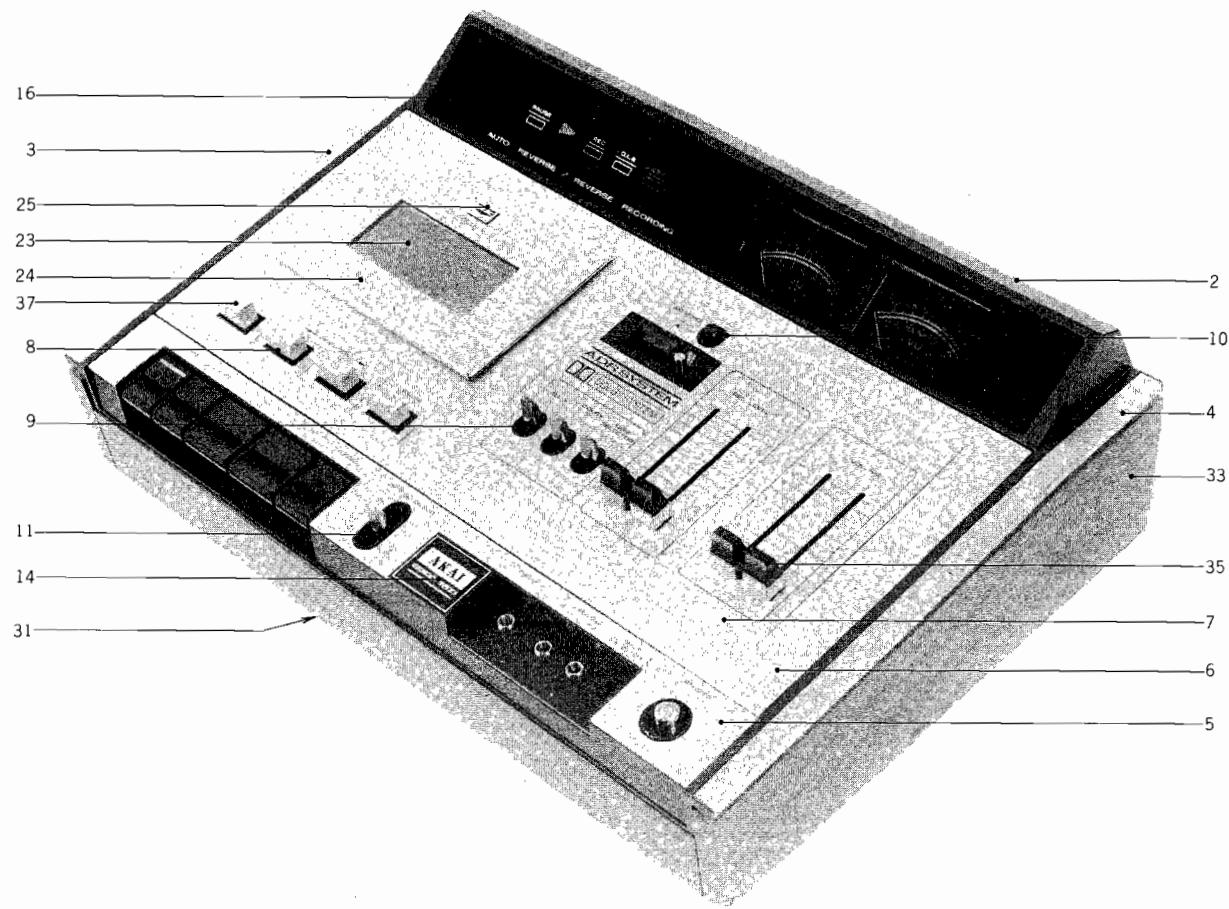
(b) FINAL ASSEMBLY BLOCK
